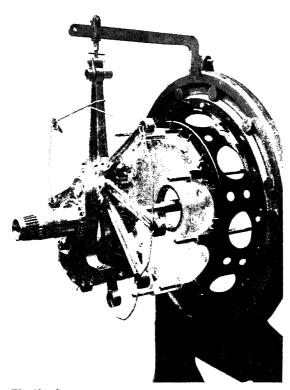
Connecting rod assembly suspended on jib for assembly to crankcase.
